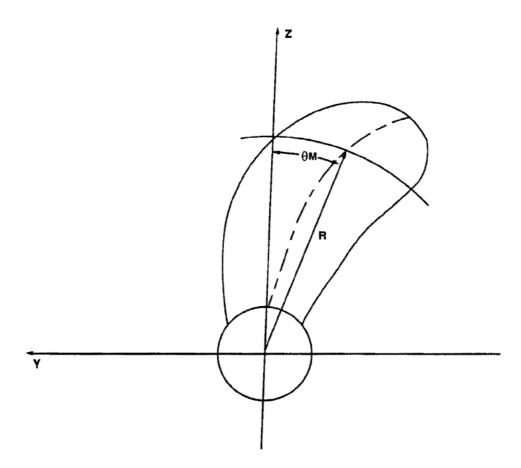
Blade Section Midchord Skew (Looking Downstream)
